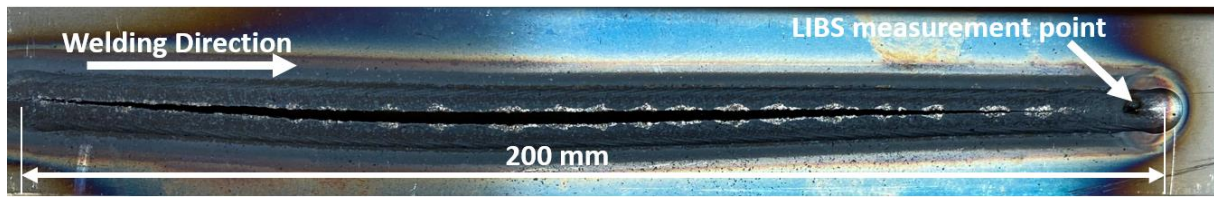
Finished weld seam of the Sample 8, LIBS measurement spot on the weld end crater is marked.
